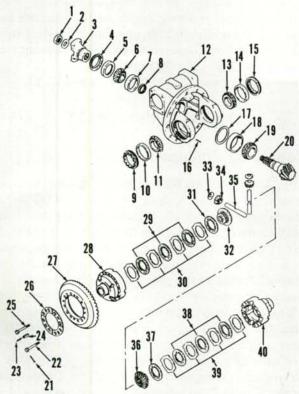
Exploded view of limited slip differential and bevel drive gears assembly used on front drive axle. Note steering cylinder is removed from differential housing.
